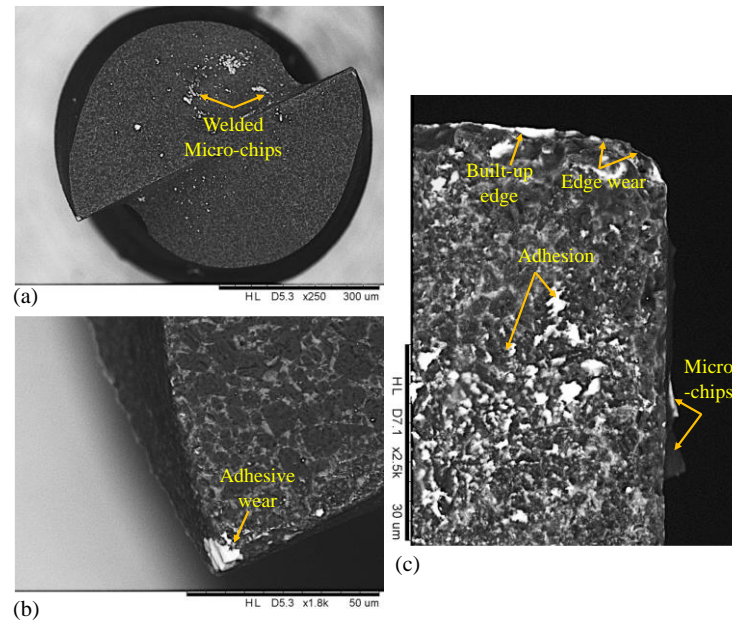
14 Tool processed on SLM Ti6Al4V ;(a) Cross section (b) cutting edge (c) rake face
